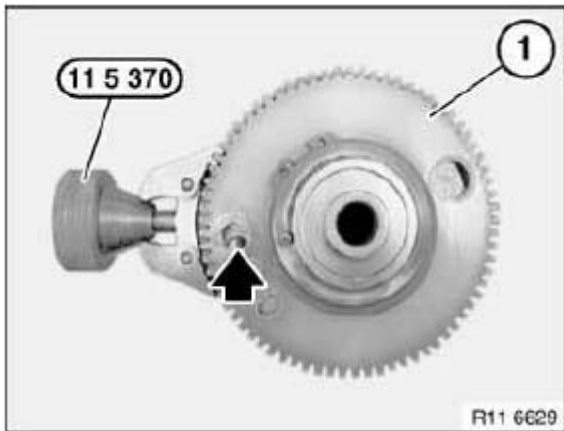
Identifying Exhaust Adjustment Unit
